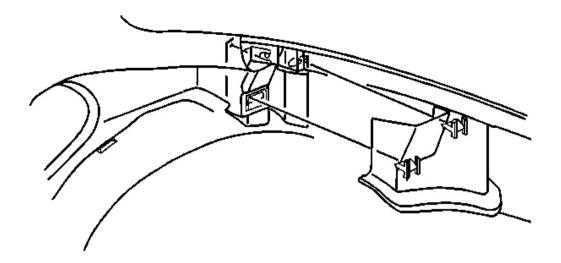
Right Deck Lid Support Trim Panel Courtesy of GENERAL MOTORS CORP.
